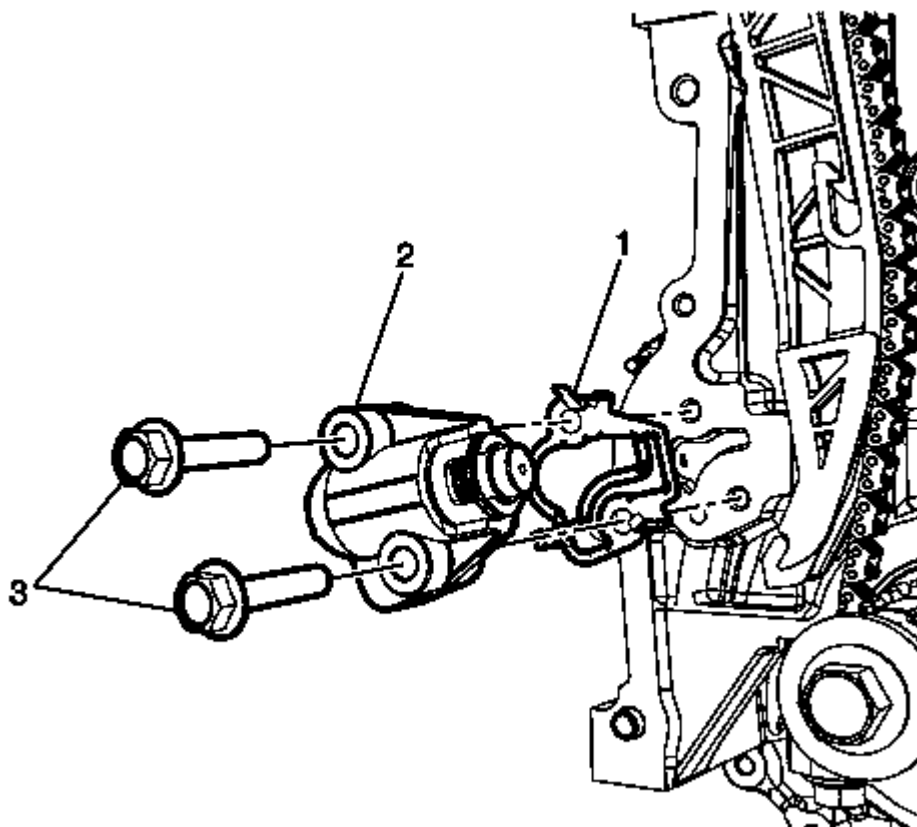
Timing Chain Tensioner Bolts And Tensioner
